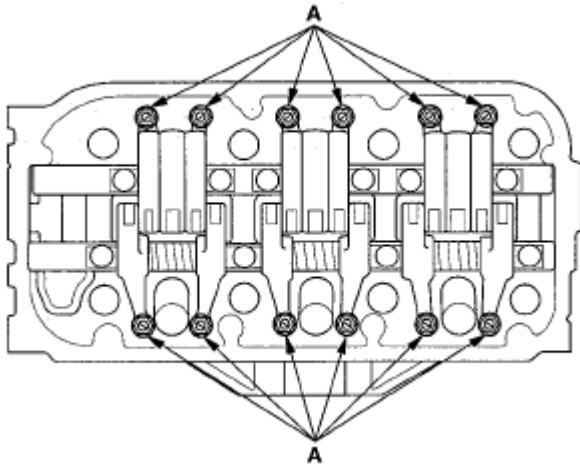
Identifying Rocker Arm Assembly Adjusting Screws
